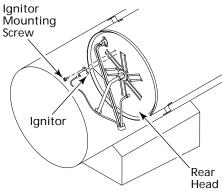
Removing Ignitor Mounting Screw and Ignitor
